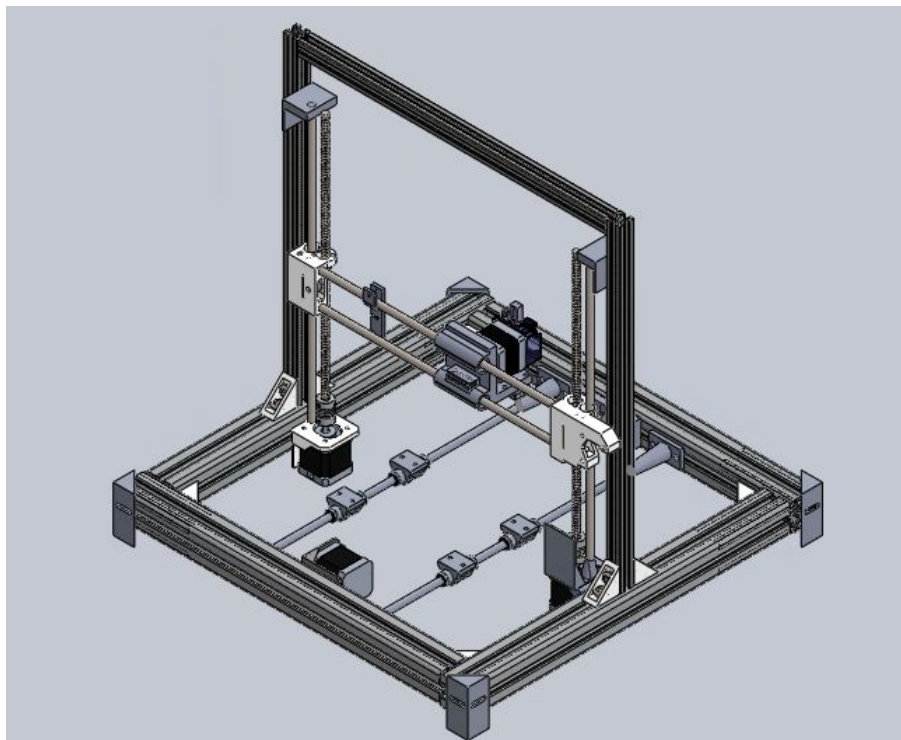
Isometric View of 3D Printer SolidWorks Assembly
